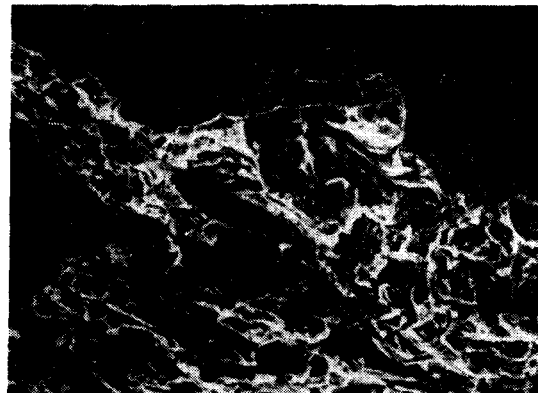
Fracture Surface of The Specimen with Axial Crack.
